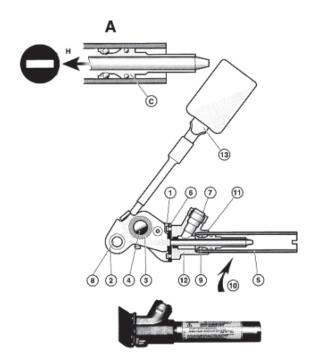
The construction of a pyrotechnical belt tensioner and the way of blocking the piston after ignition in order to prevent it from reversing: 1 – plate, 2 - support, 3 - reel, 4 – reel rivet, 5 - tube, 6 – fastening bolt, 7 – gas generator, 8 - backing, 9 - beads, 10 – information sticker, 12 – code and production date, 13 – cable and latch [1]
